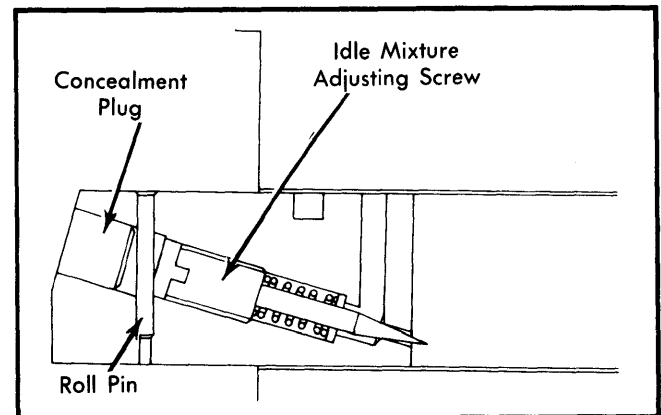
Exploded View of Tamper-Proof Idle Mixture System
